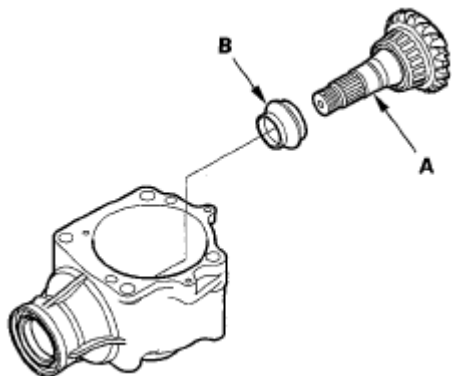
Identifying Transfer Output Shaft And Transfer Spacer
